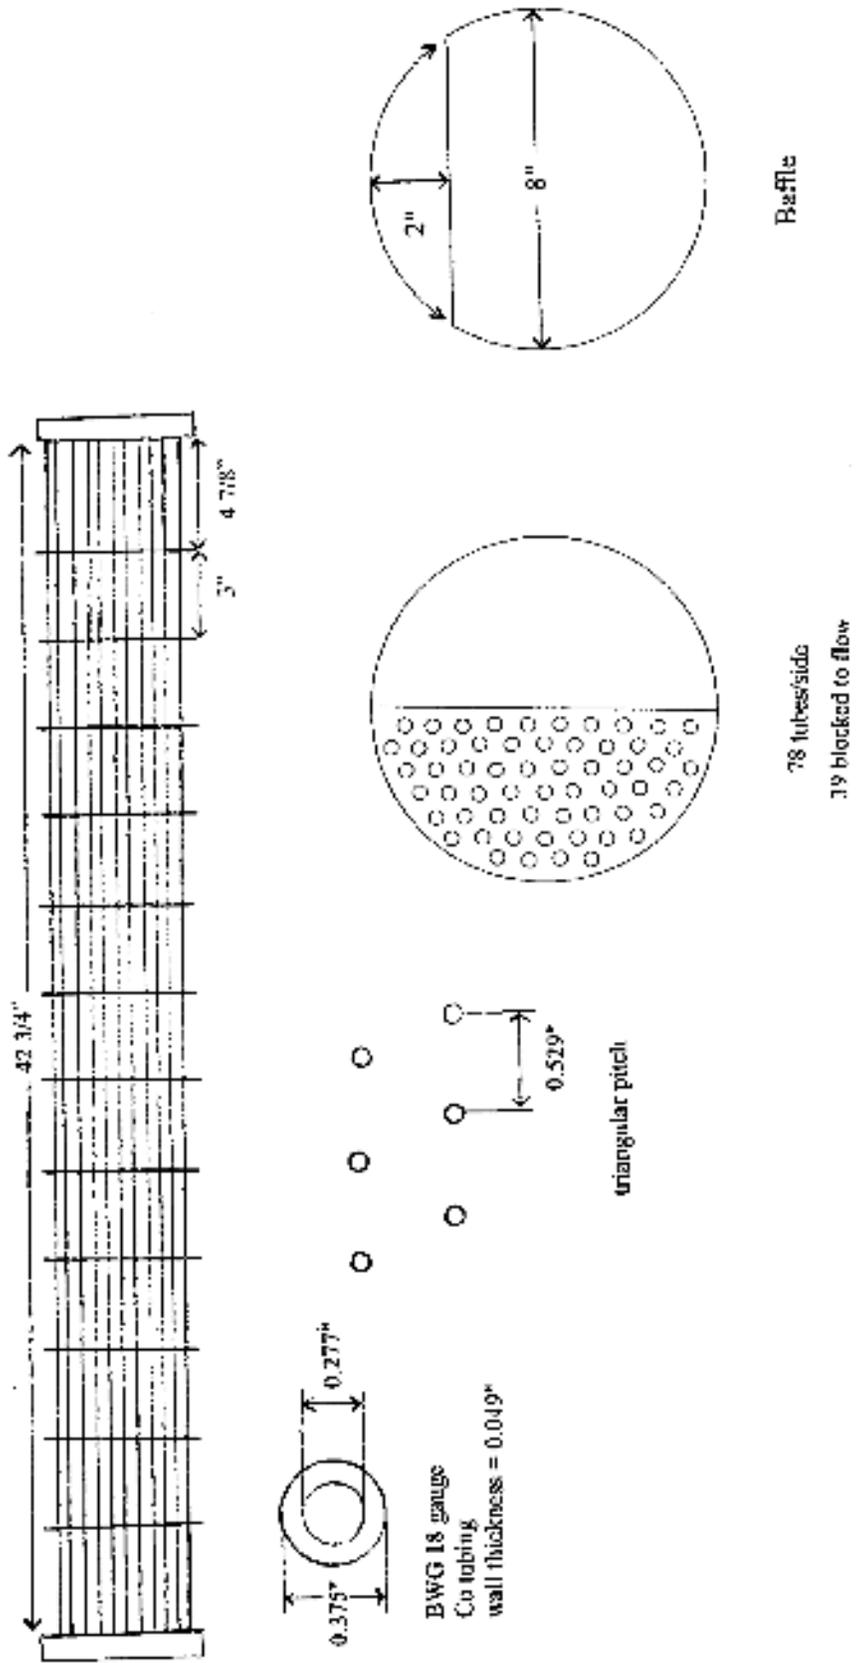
Internal dimensions of the shell-and-tube heat exchanger
